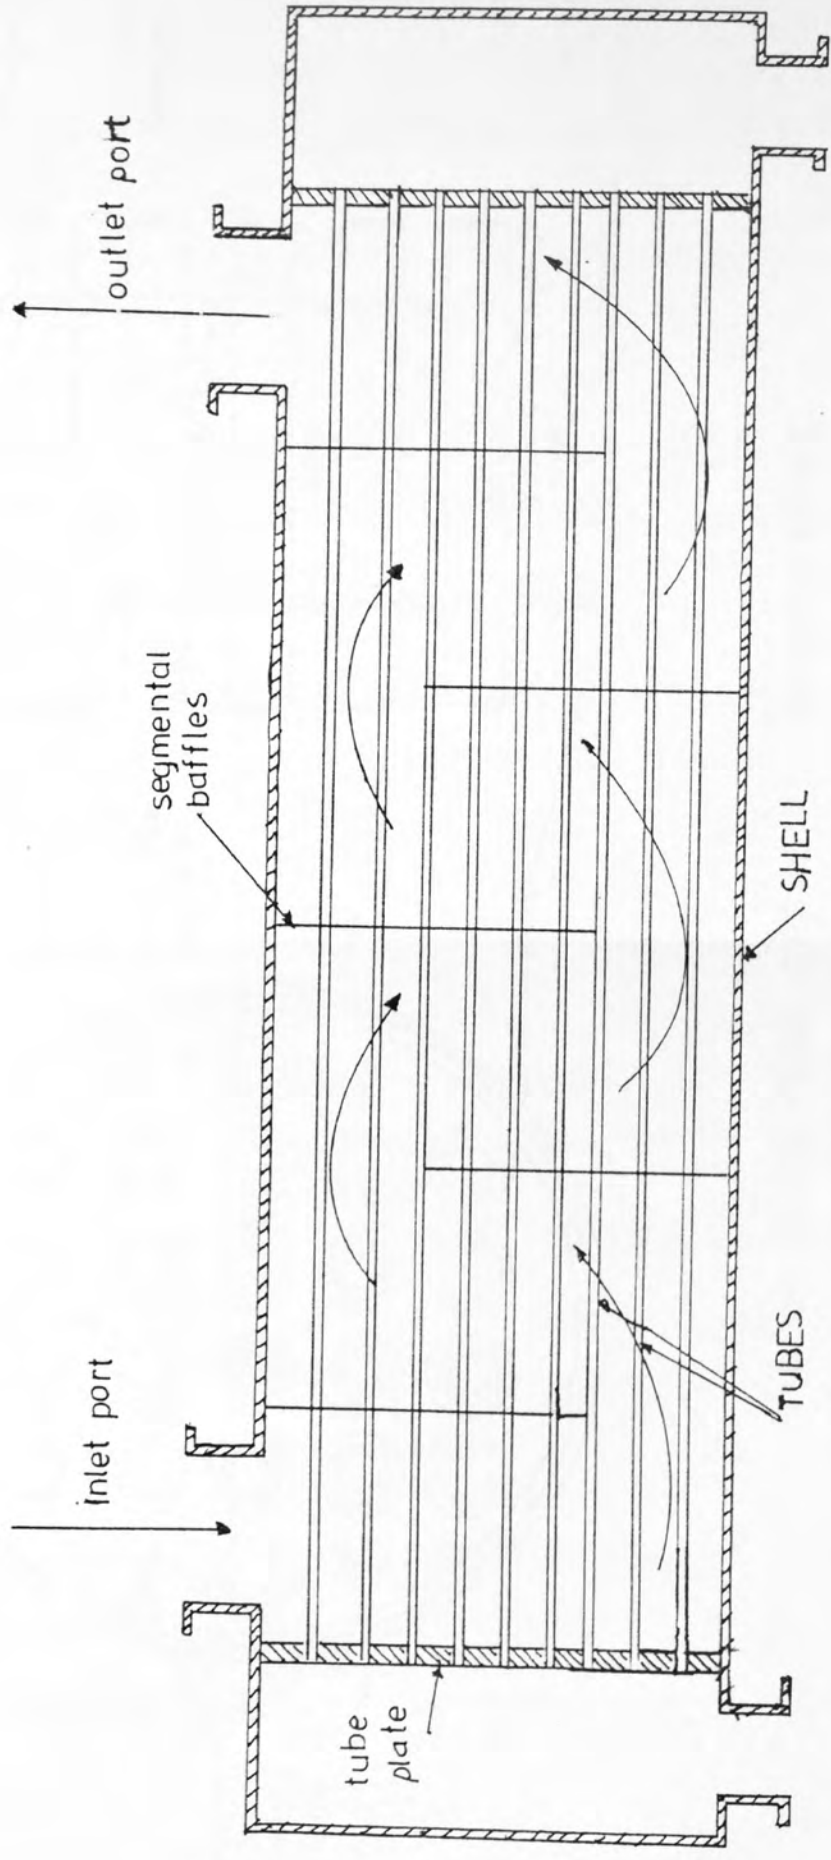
SEGMENTALLY BAFFLED SHELL AND TUBE HEAT EXCHANGER WITH SINGLE PASS SHELL
